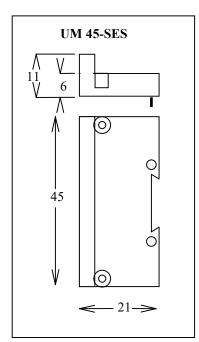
Auxiliary Terminal Board Assembly Drawings
